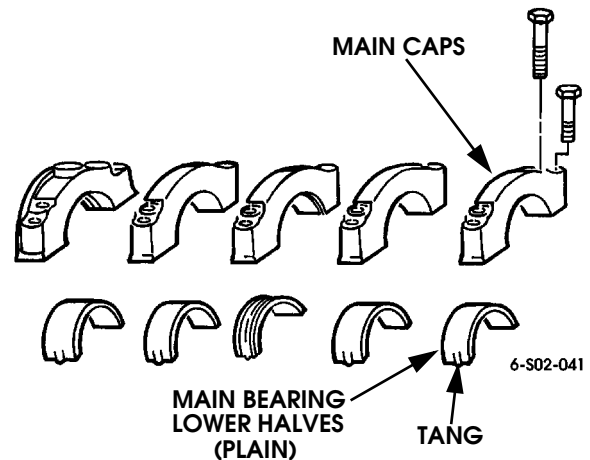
Assembling Main Caps and Bearing Lower Halves
